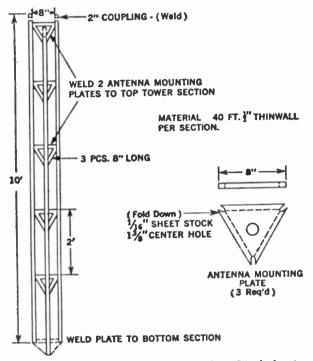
Construction details for a 10 ft. section of typical antenna tower. With an antenna tower of this type elevations of up to 50 feet may be reached.
